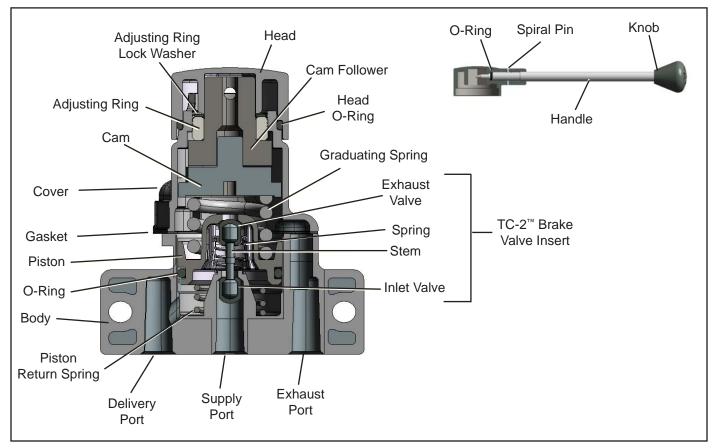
BENDIX® TC-2™ SECTIONAL VIEW
